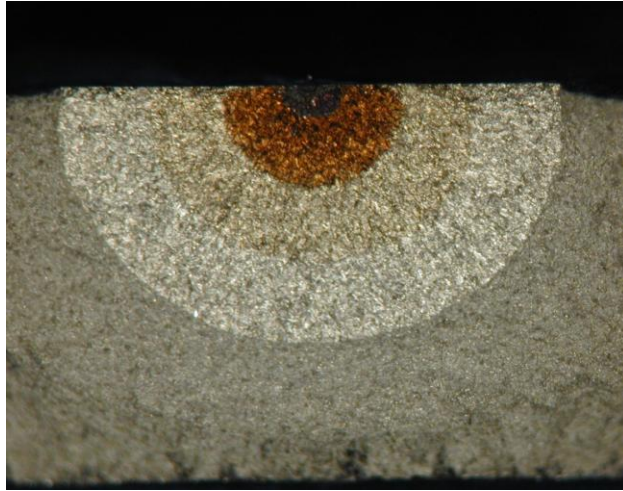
Example of the fracture surface of a Kb-specimen.
